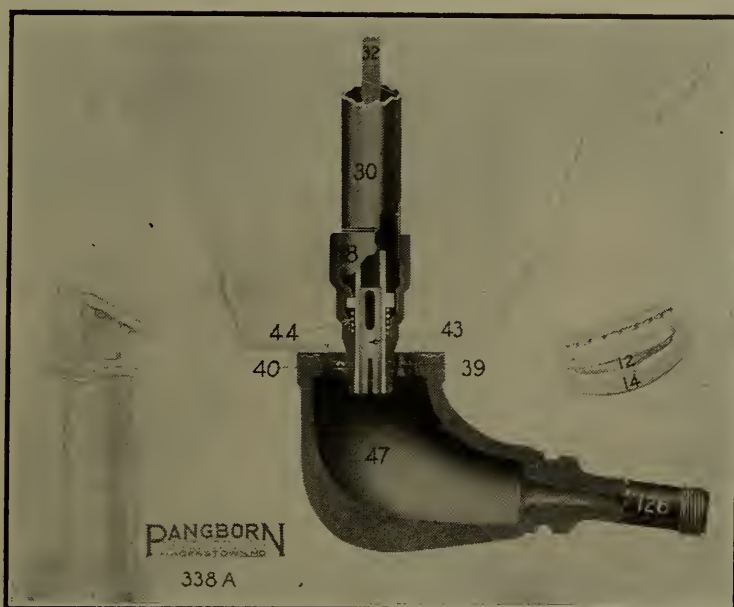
Mixing Chamber of Hose Sand Blast Machine.
